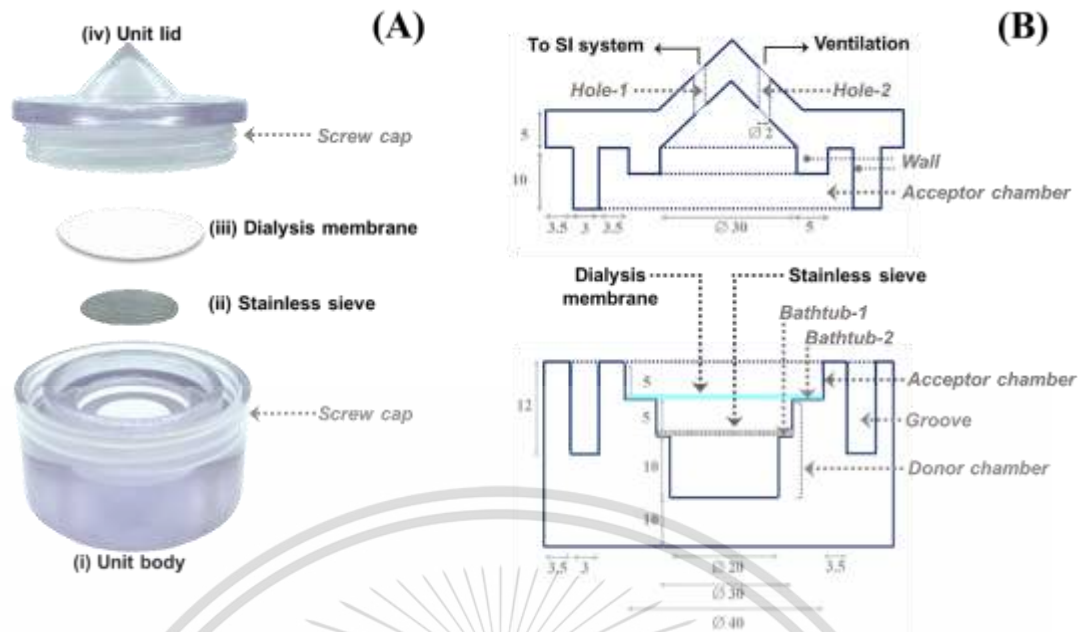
(A) Photograph and (B) Schematic drawing of the exploded view of the ‘in-house’ 3D printed dialysis unit for direct analysis of solid and liquid samples. Note: All dimensions as illustrated in Figure 4.4(B) are presented in ‘mm’.
